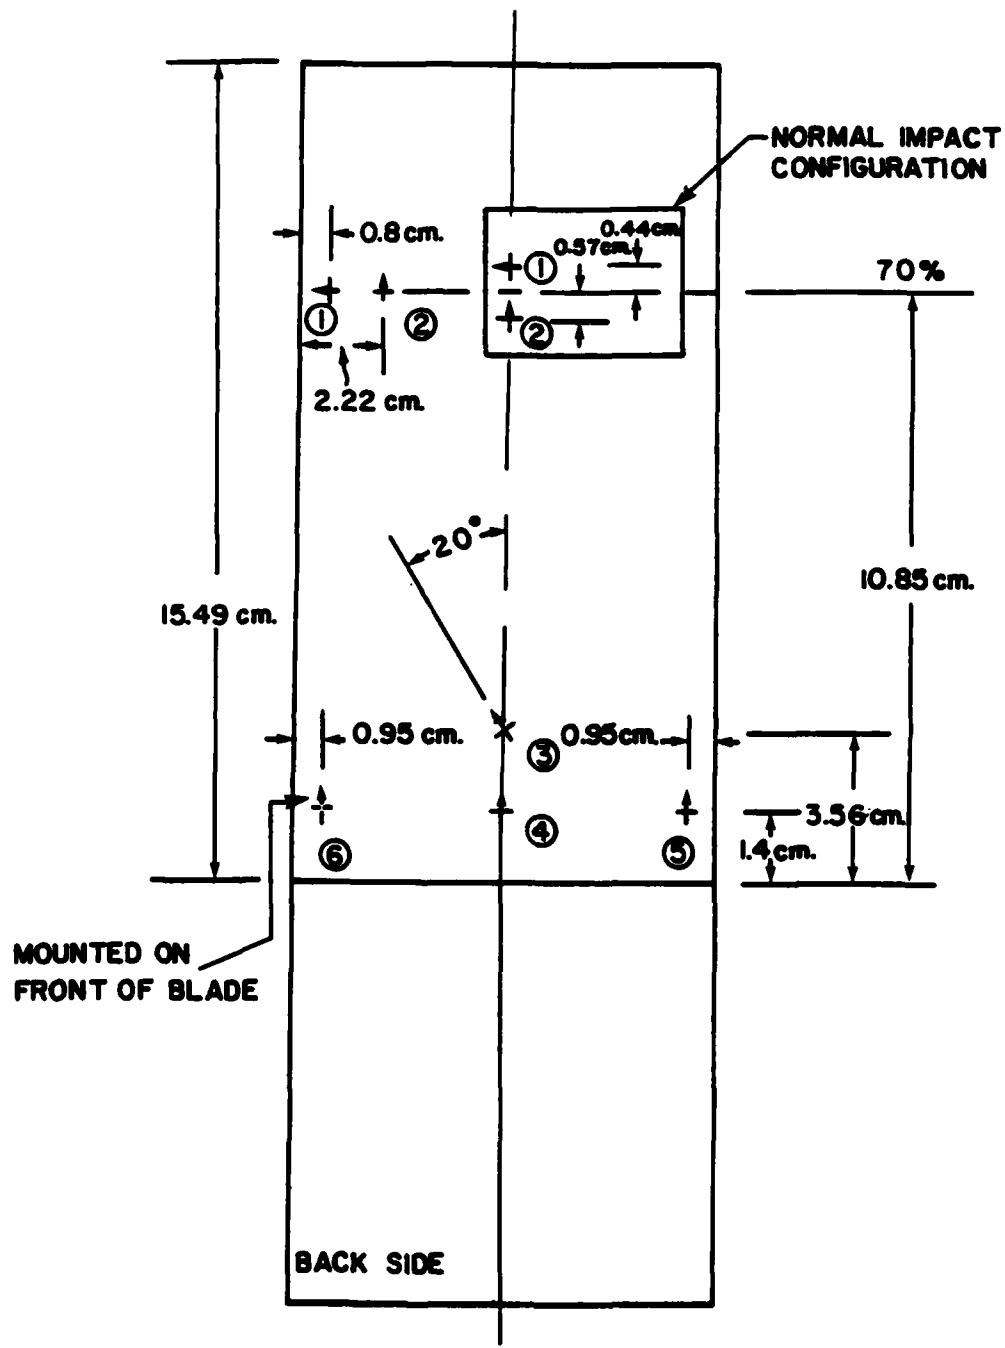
A. Strain Gage Locations for Group 14 and 16 Structural Element Test Specimens.
